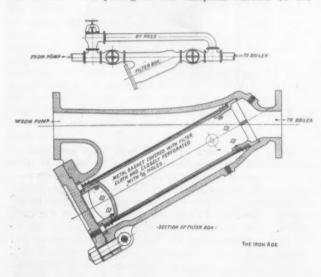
An Oil Extractor for Inserting in the Feed Line to the Boilers.
